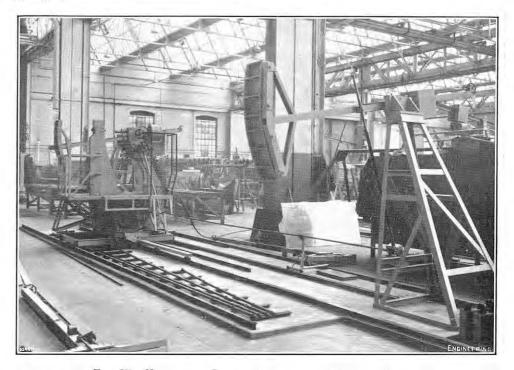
Horizontal Squeeze-Riveter for Fuselage Panels.
